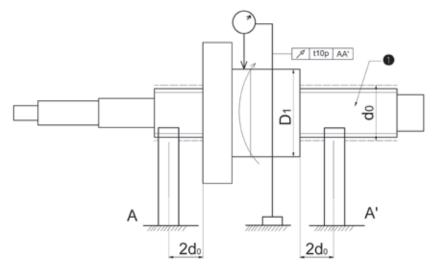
Measurement of the radial runout $t_{\rm 10}$ of the outer diameter of the Ball Screw nut
